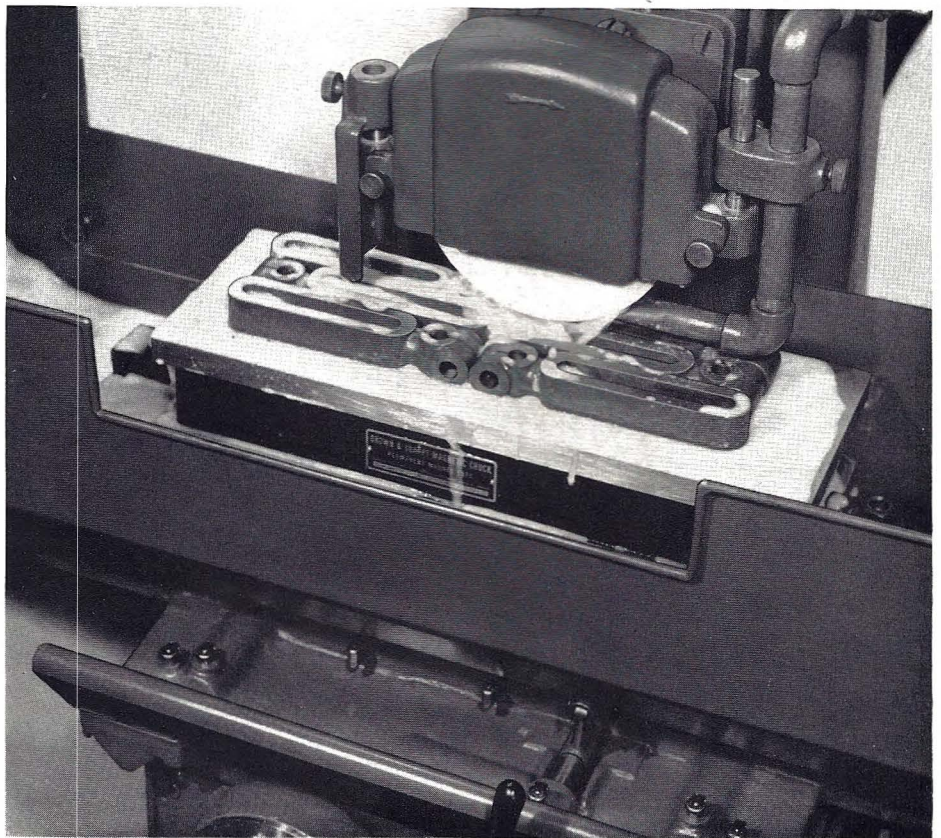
Another representative production job — grinding the parallel faces of brackets. Six pieces are held on the permanent-magnet-type chuck at each loading, and the coolant supplied by the Wet Grinding Attachment allows relatively heavy cuts to be taken without distortion of the work due to heating.
